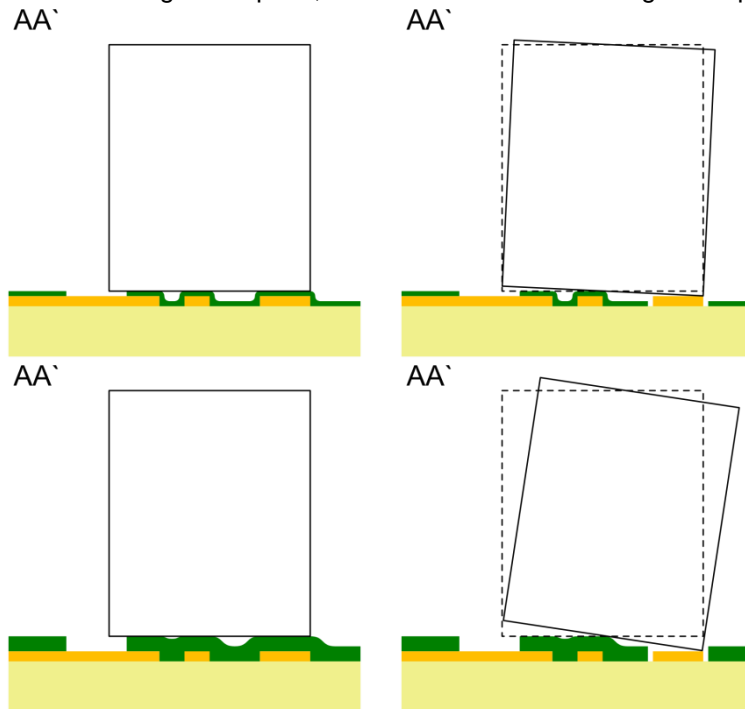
Correct(left) and wrong(right) layout of copper and solder mask for solder masks both thinner(top) and thicker(bottom) than the copper layer when additional copper is routed through the footprint.
